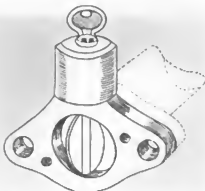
The Parkin safety lock for preventing gasoline vehicles from being stolen. It is inserted between the carburetor and intake manifold flanges.
